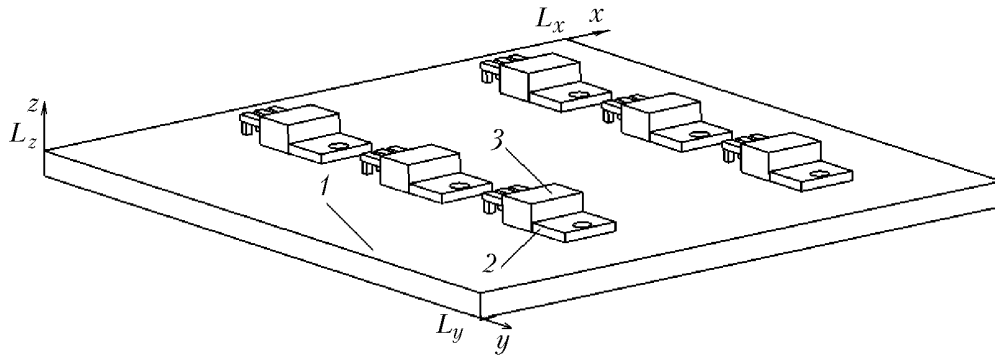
Geometry of the solution domain: 1) printed-circuit board; 2) heat removing surface; 3) transistor case.
